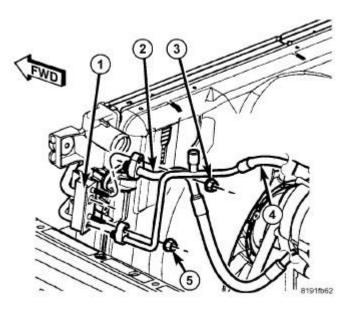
Refrigerator Lines To Condenser Courtesy of CHRYSLER LLC
